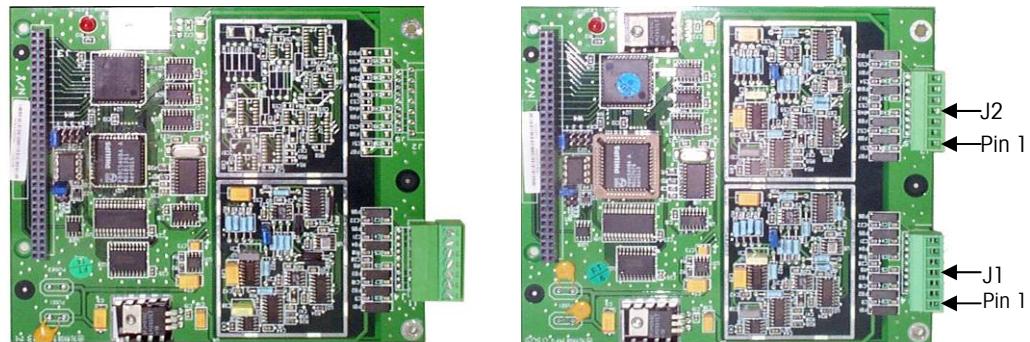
Single (left) and A/D (right) Board Connector Locations
